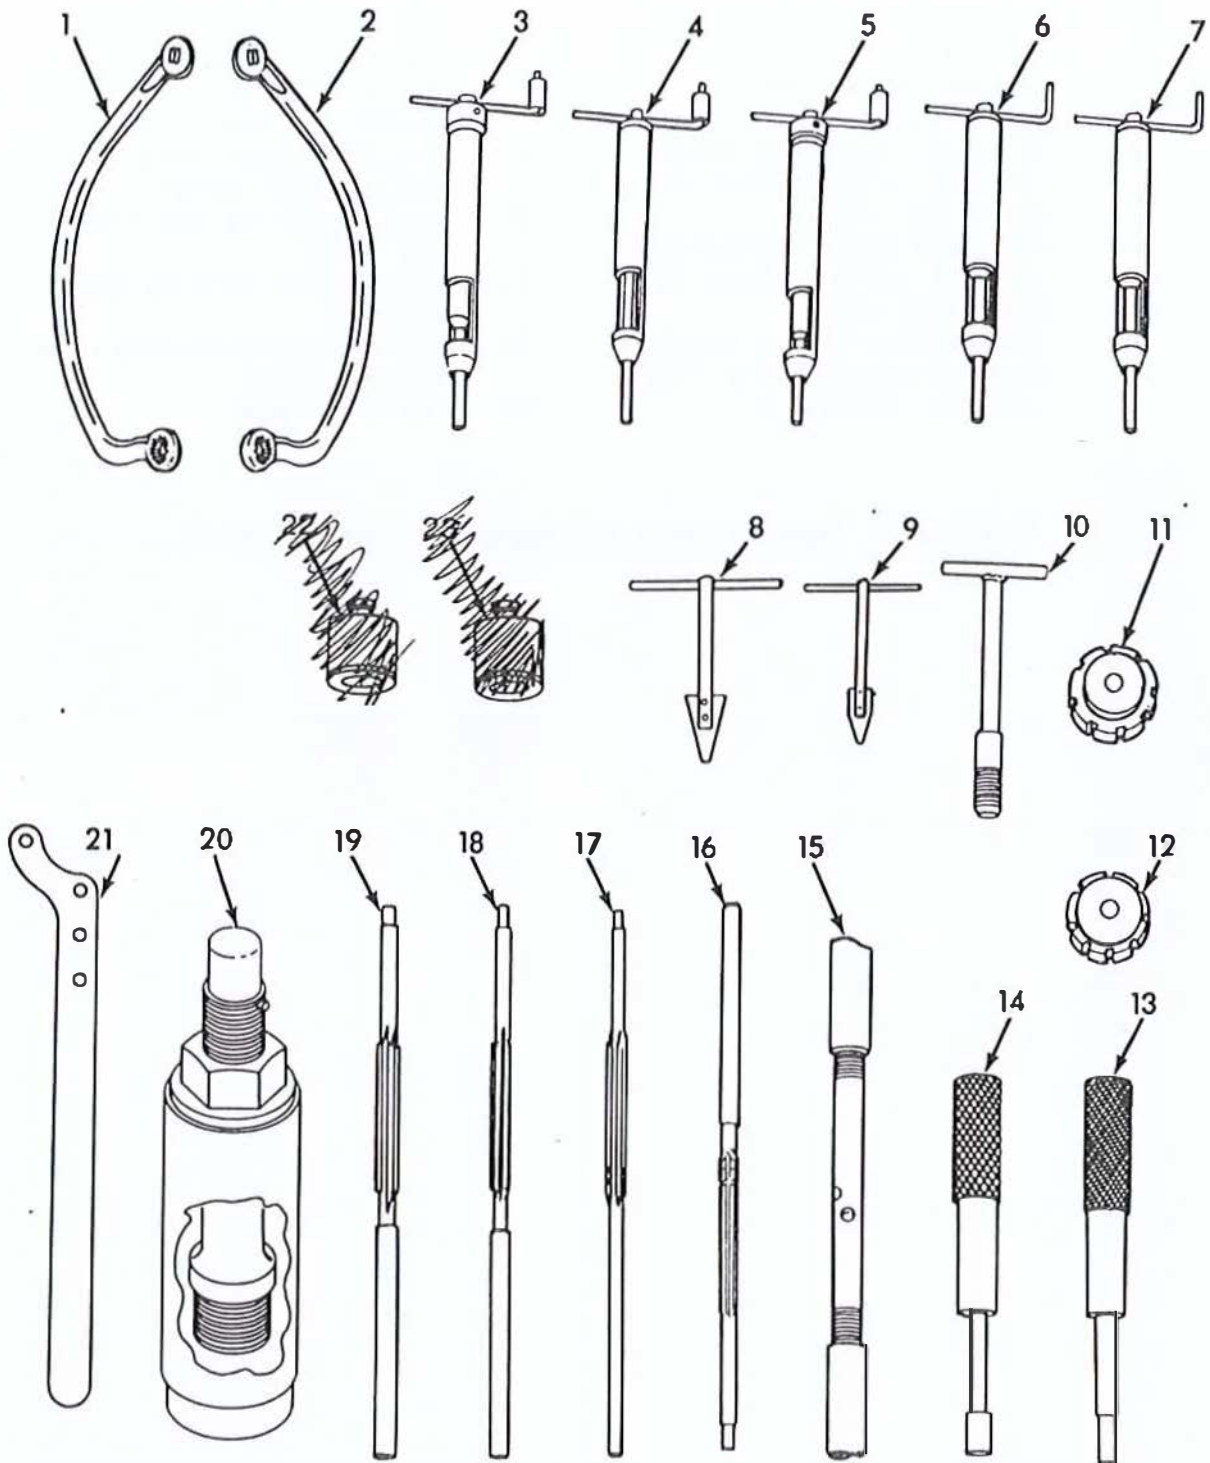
Special tools and equipment (sheet 1 of 2).
